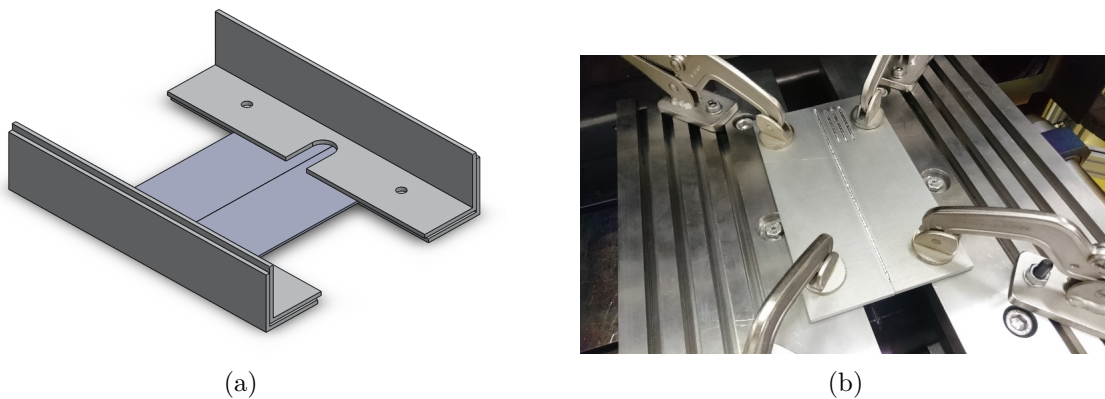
Clamping systems for welding: (a) L-profile clamping and (b) collet clamping
